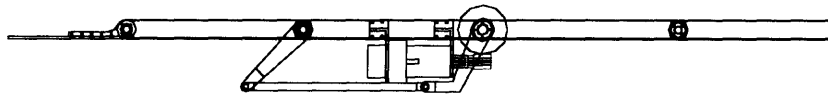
CAD Drawing of Side View of the 1-DOF Bed/Chair
